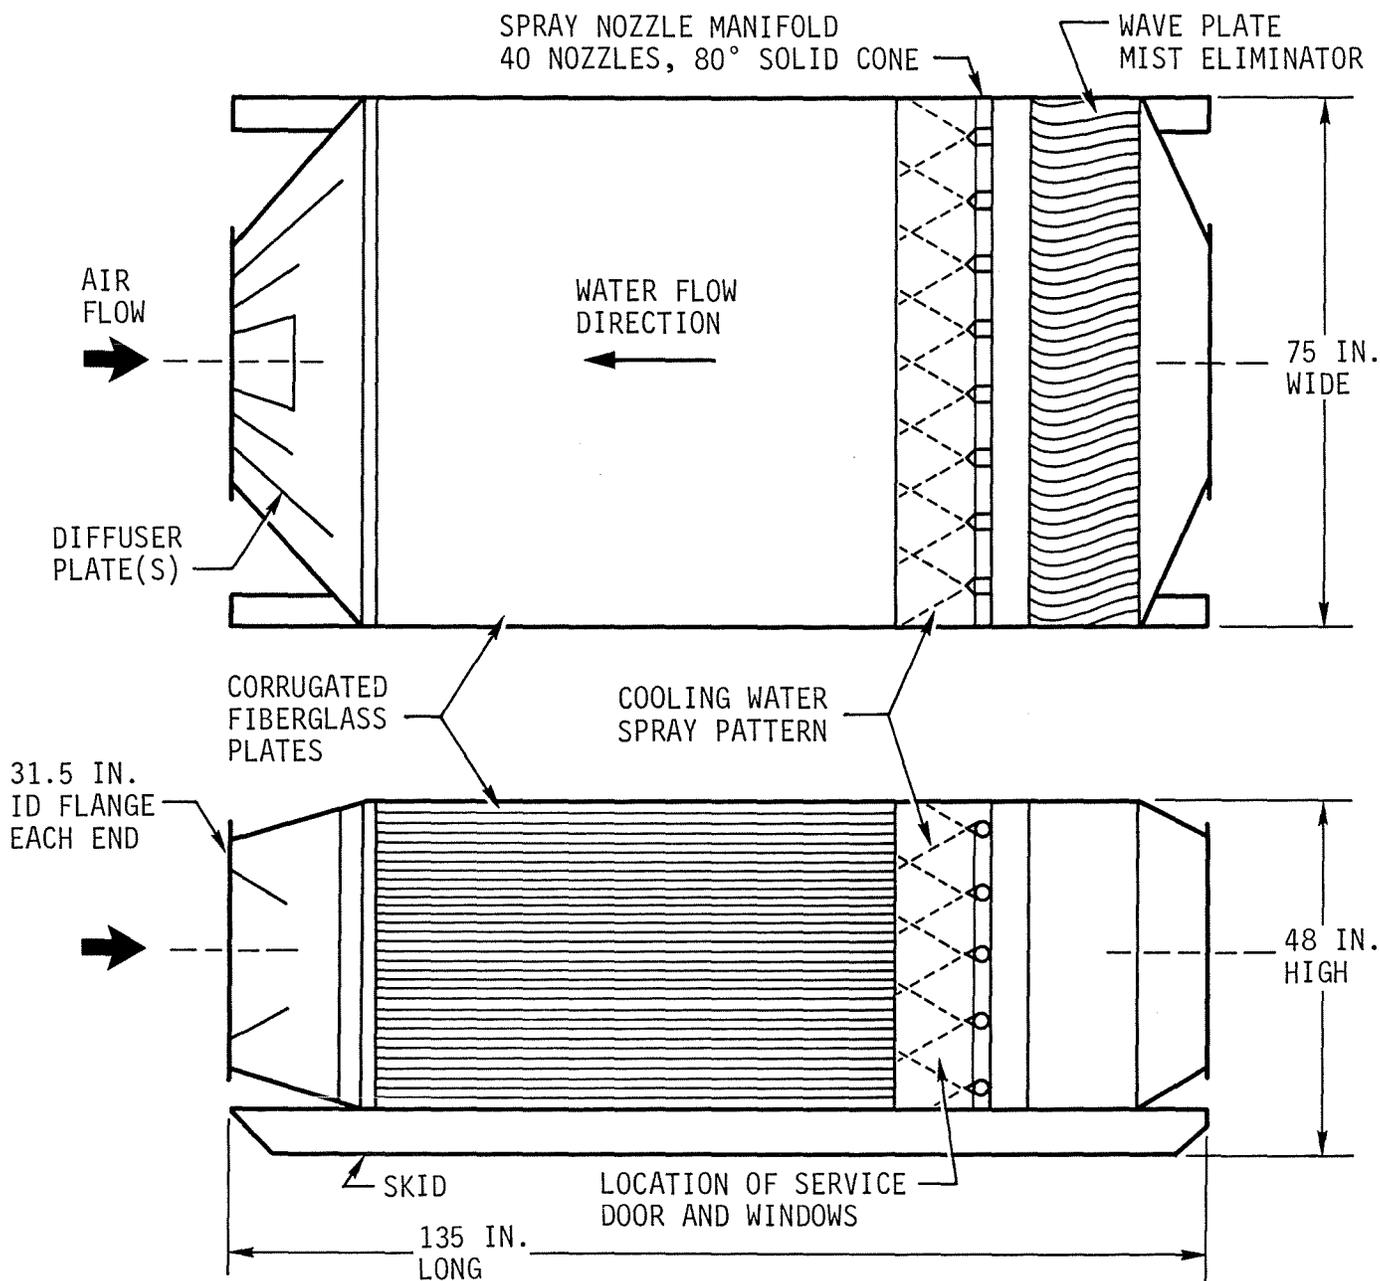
Single-stage cooler - tested at Mt. Taylor.
